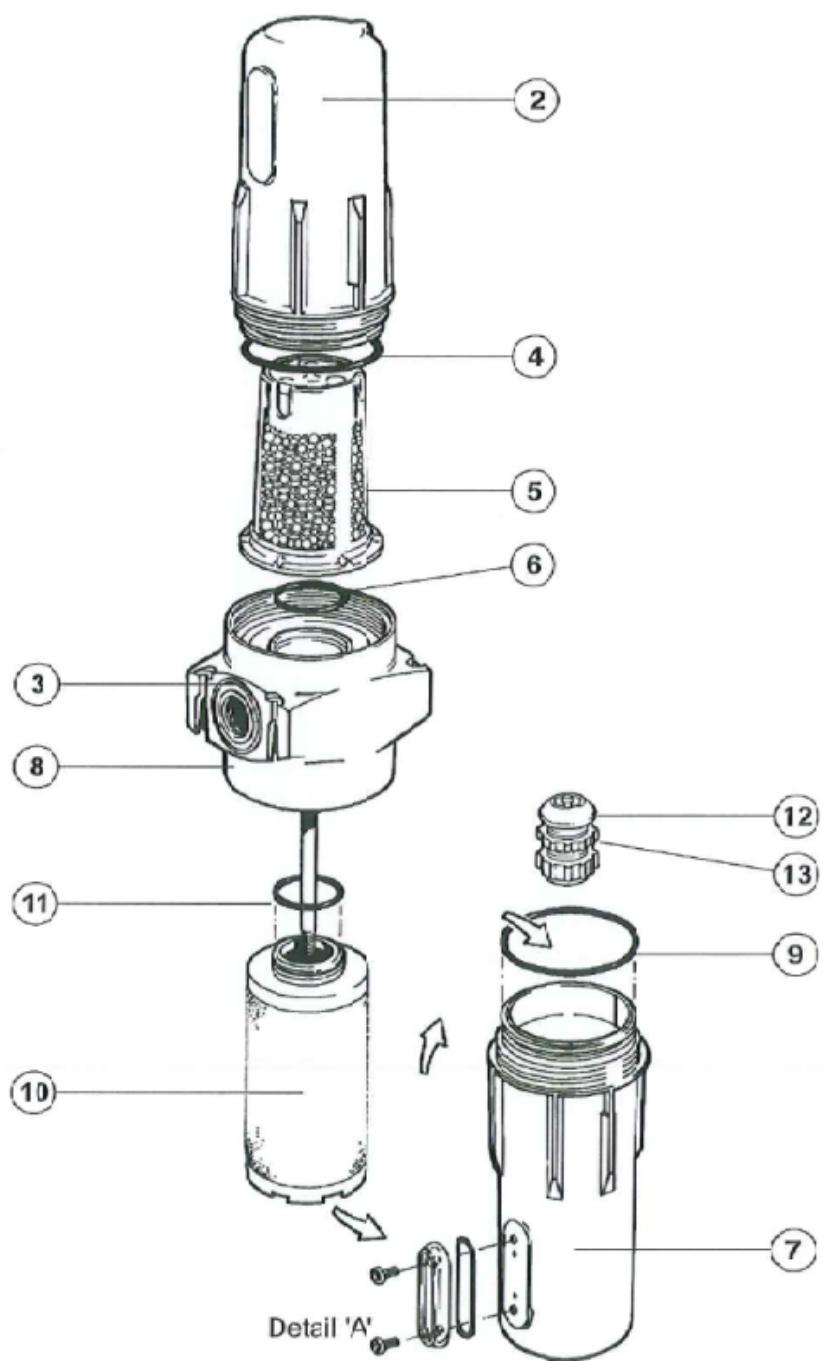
Exploded Drawing of 6th and 7th Filtration Stages
